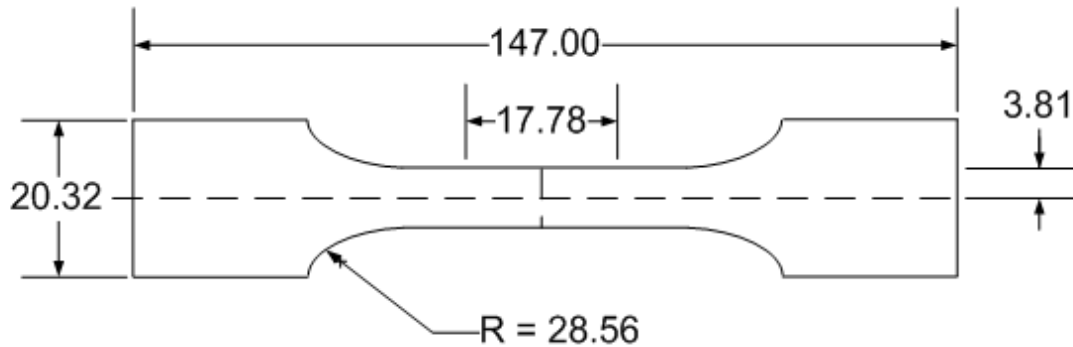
Tension-Tension Fatigue Test Specimen. All Dimensions are in mm. All Tolerances are ± 0.025 mm.
